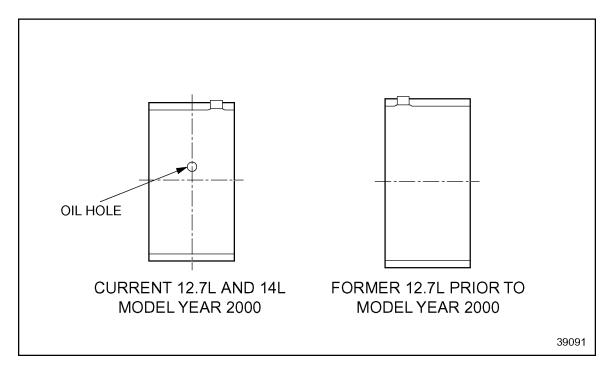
Connecting Rod Bearings for 14 L and 12.7 L Engines
